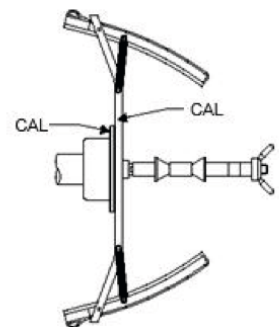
Application of the motorbike flange onto the shaft. Align the writing "Cal" on the flange and on the flange for motorbikes
